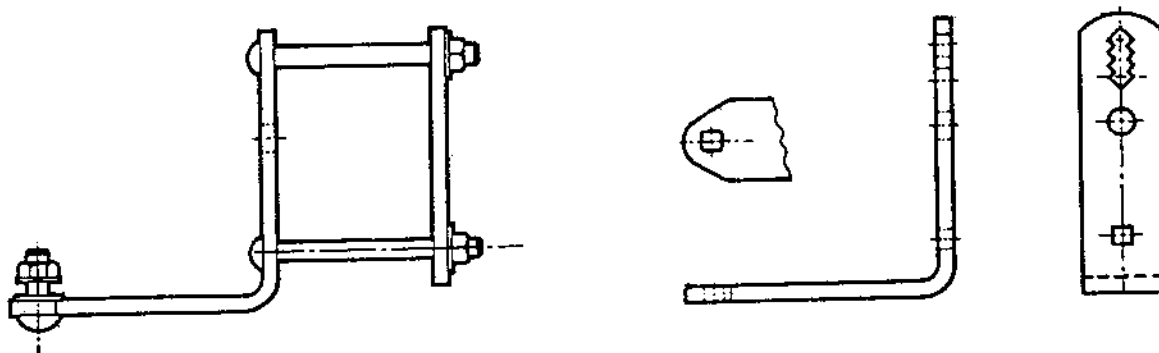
Type C mounting bracket. Dimensions and details are to be the same as type B except for the extended arm which shall be 100 mm long.
